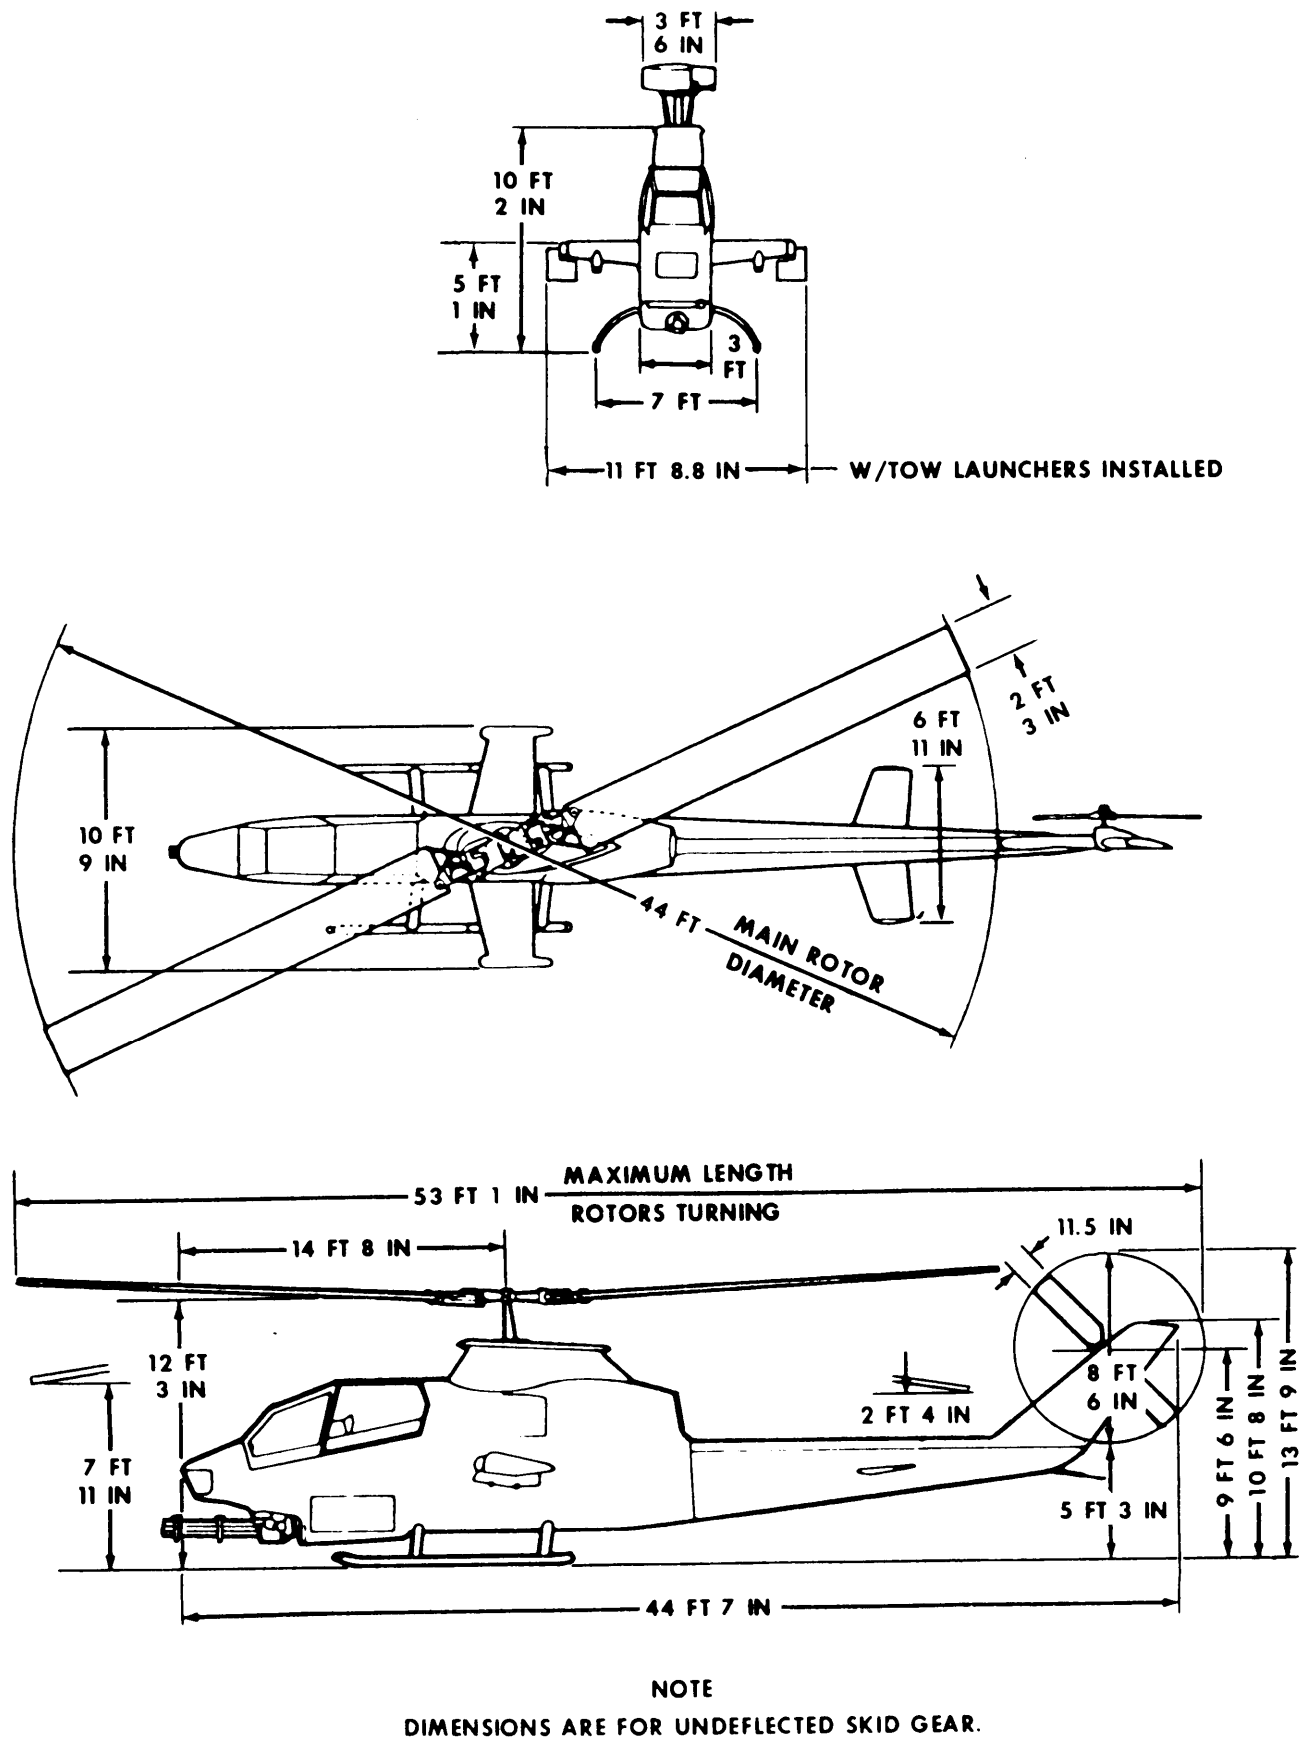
Principal dimensions, AH-1S (front, top, and side views).
